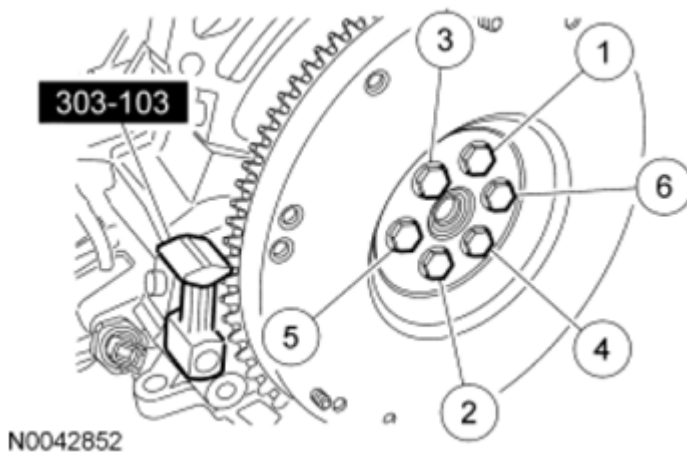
Identifying Flywheel Bolts Tightening Sequence
